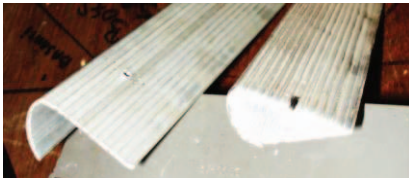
The bent sheet of aluminum (*left*) has been folded to make the bucket (*right*)
